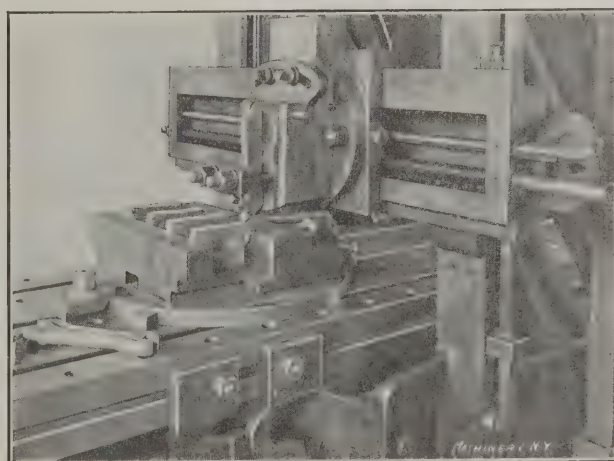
The Tool in Position Ready for the Roughing Cut.
